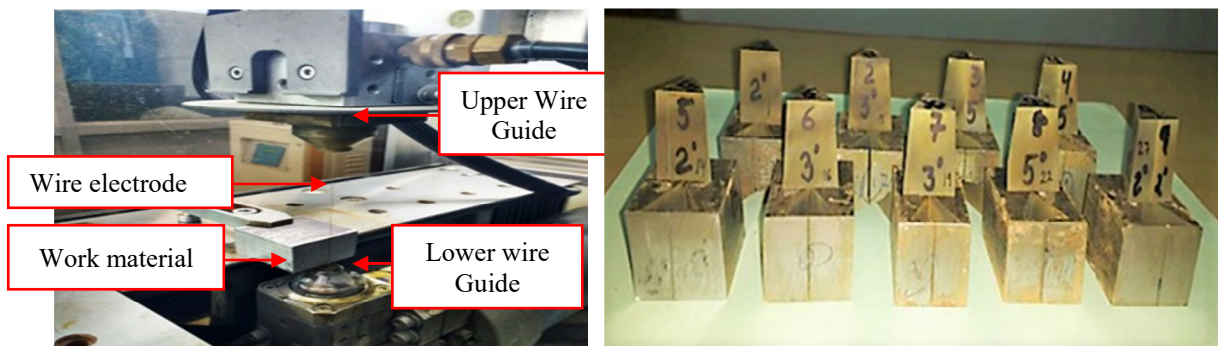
Work material mounted before the start of experimental run and the final work material after taper cutting using WEDM
